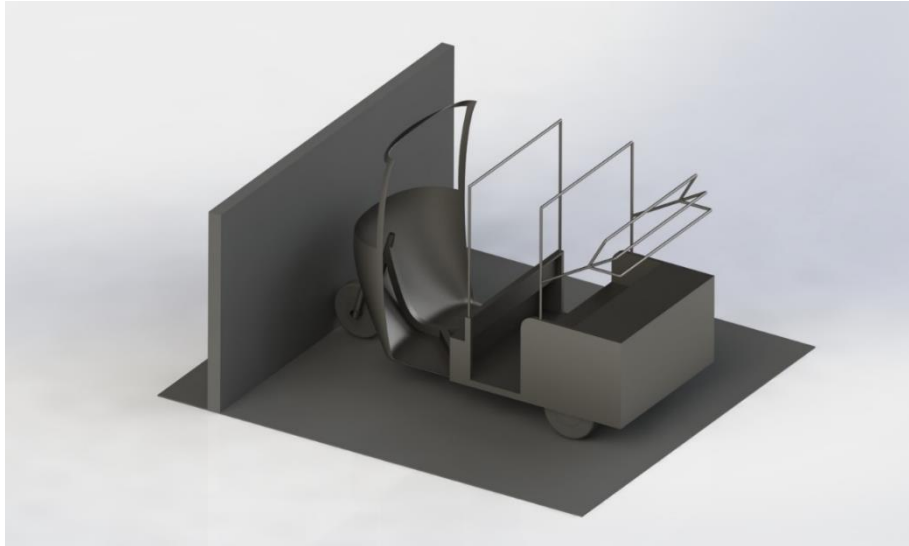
Full Width Frontal Impact Test - Full Assembly
